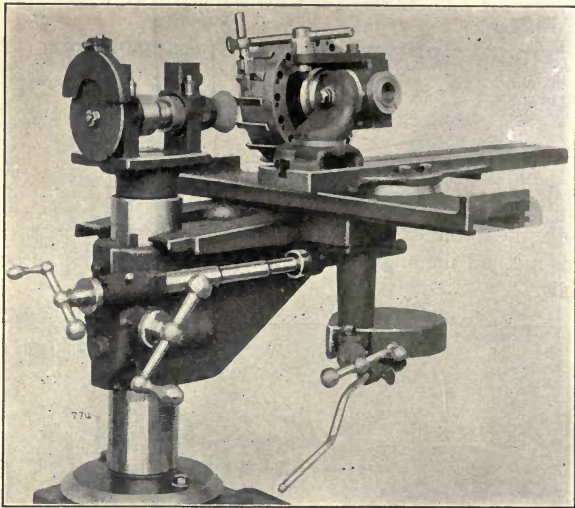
Grinding the peripheral teeth of a large milling cutter on a Cincinnati grinder.
